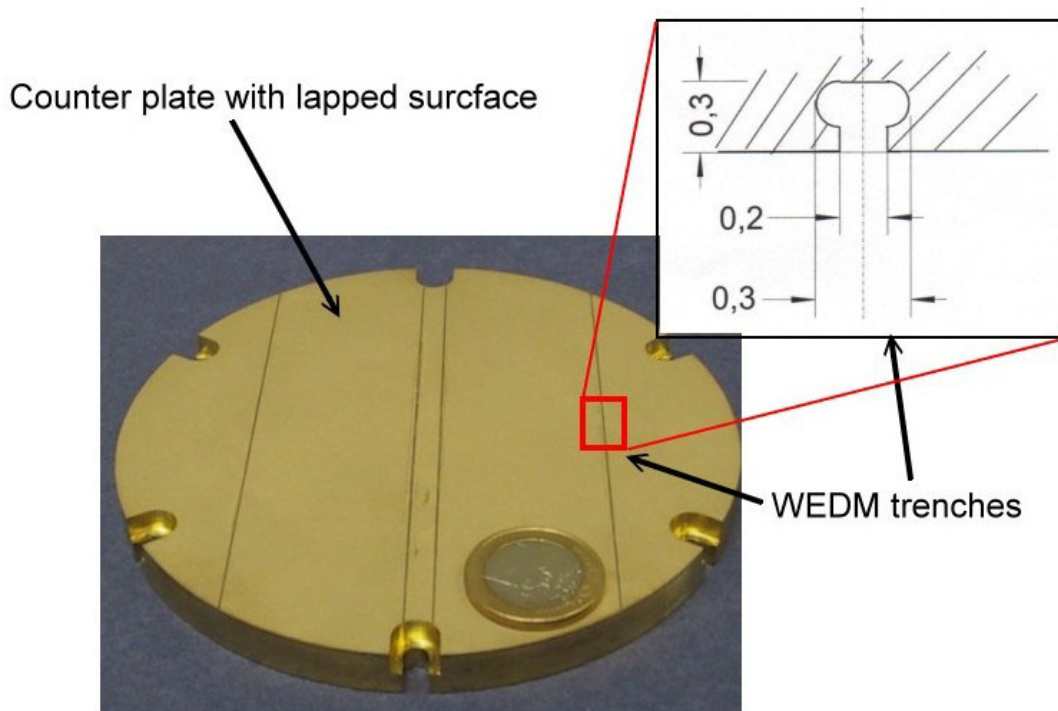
The lapped counter plate with wire EDM trenches used in the hot-embossing process for the ball chamber layers.
